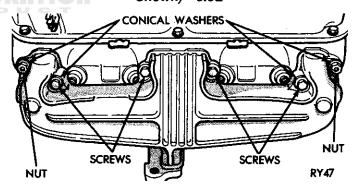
Exhaust Manifold Installation (5.2L Engine Shown)
